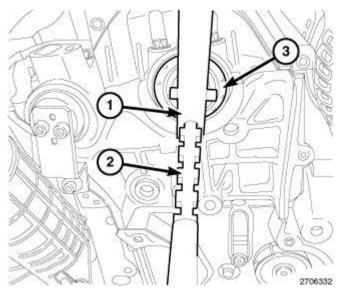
IDENTIFYING SEAL REMOVER HANDLE, SEAL REMOVER & INTAKE CAMSHAFT OIL SEAL Courtesy of CHRYSLER LLC
